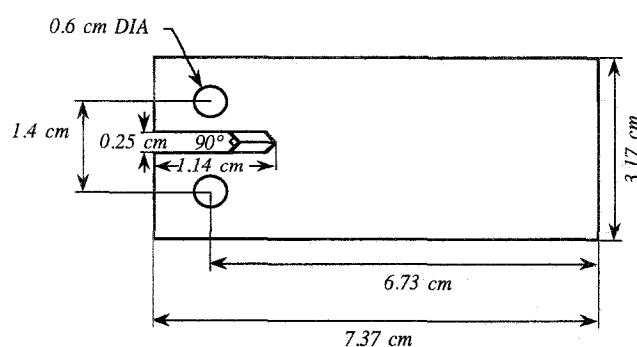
Dimensions of the compact tension specimen machined from the injection moulded sheets. The specimen is 6.4 mm thick and contains side grooves, each 0.5 mm deep
